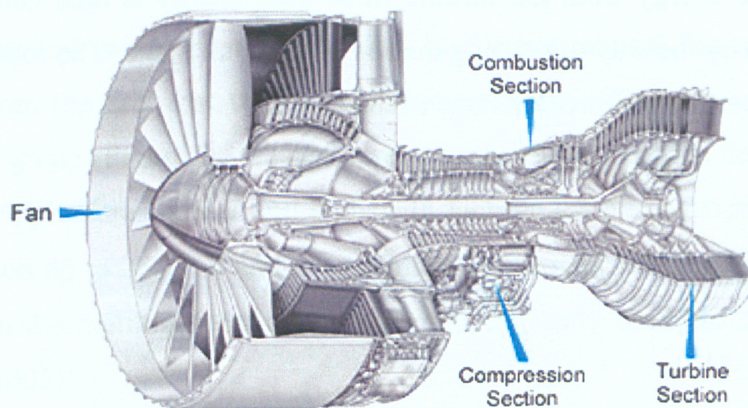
A schematic view of the typical turbine engine. Courtesy of Pratt & Whitney
